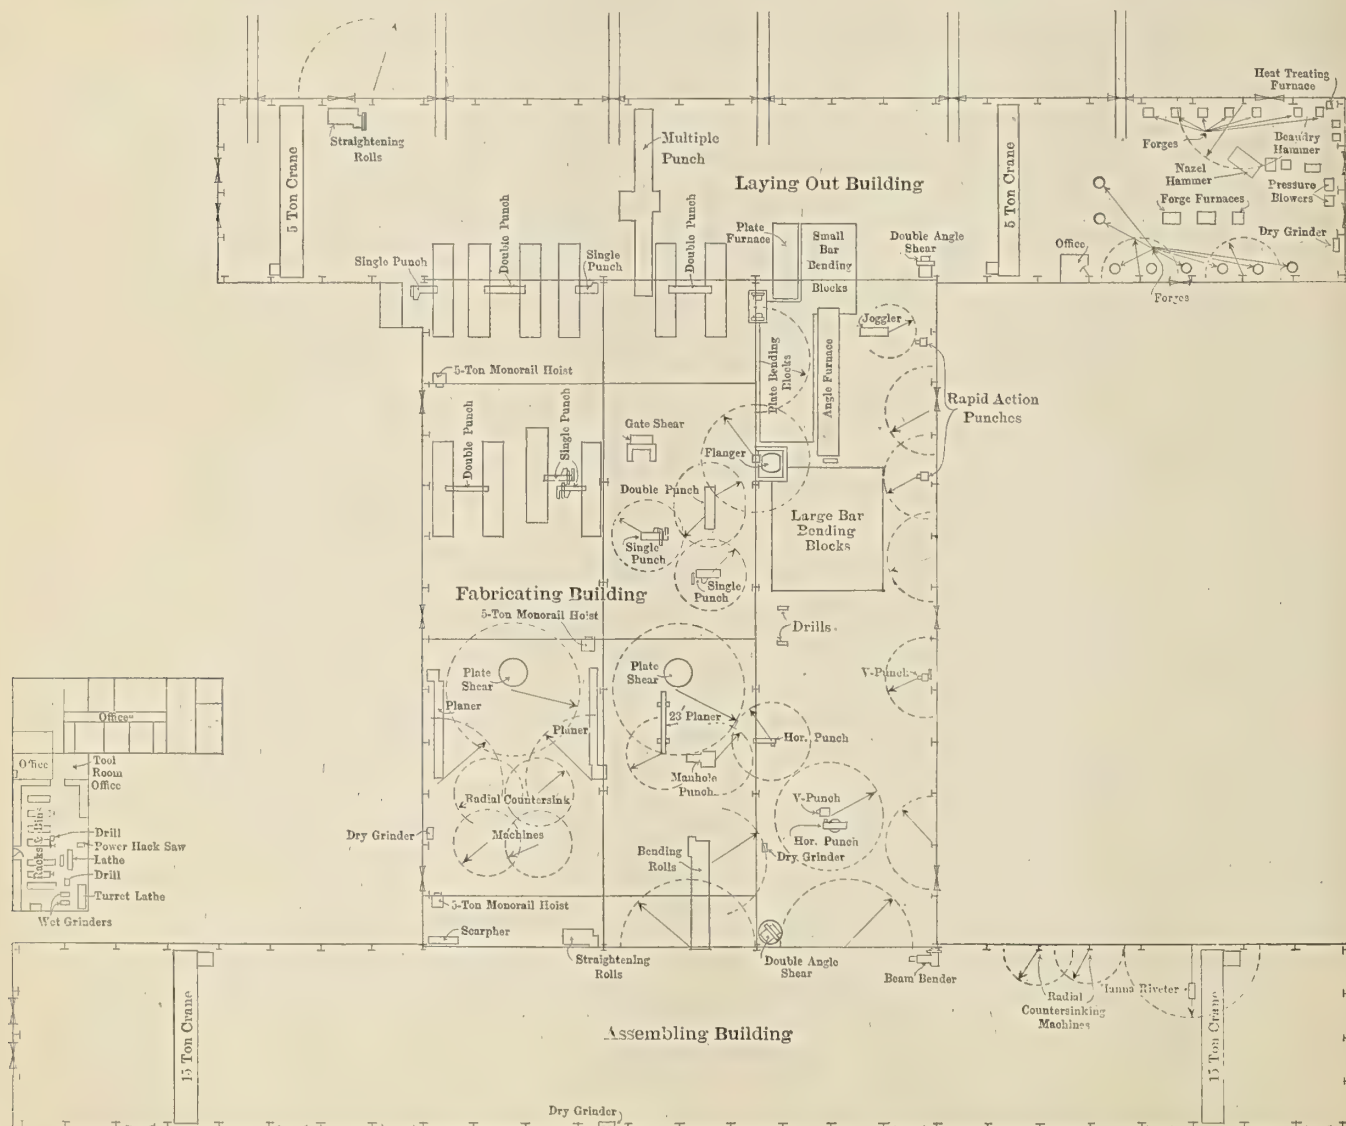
Plan of Main Fabricating Shops at Head of Shipways, Showing Location of Machinery
